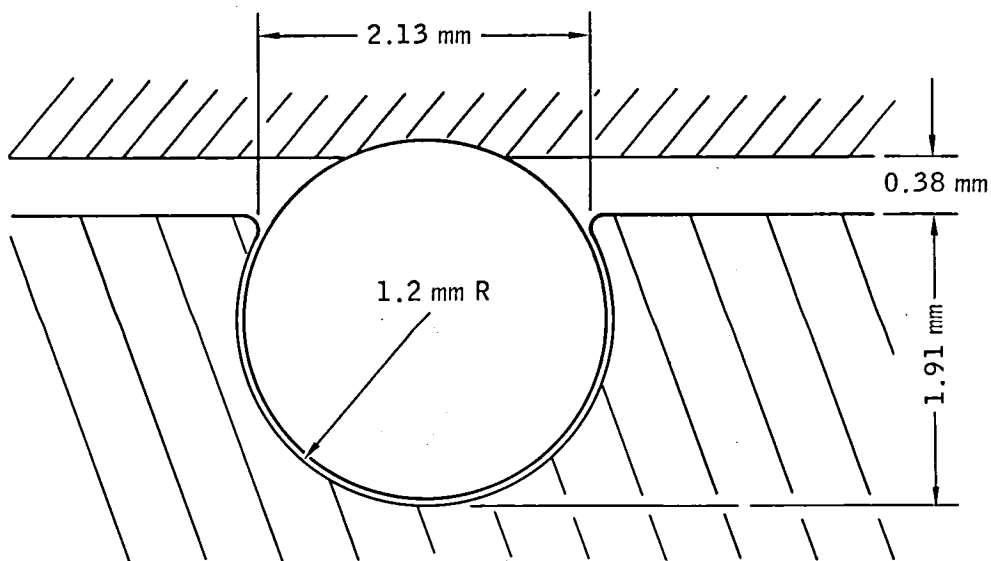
Cylindrical Insert With 0.025 mm Clearance
